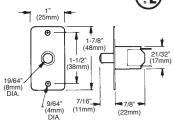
PLATE MOUNTED ROCKER SWITCH with BAKELITE ROCKER ARM MODEL NO. R62-8406
